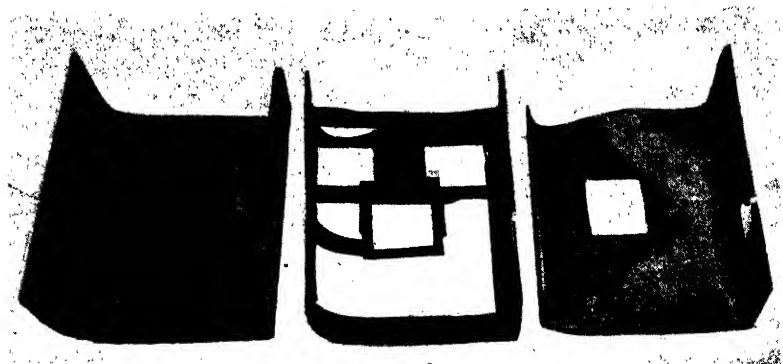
The template fixture shown in Fig. 84 is here shown with the uncut blank for the part on the left and the finished part on the right. (Courtesy of R. G. LeTourneau, Inc.)
